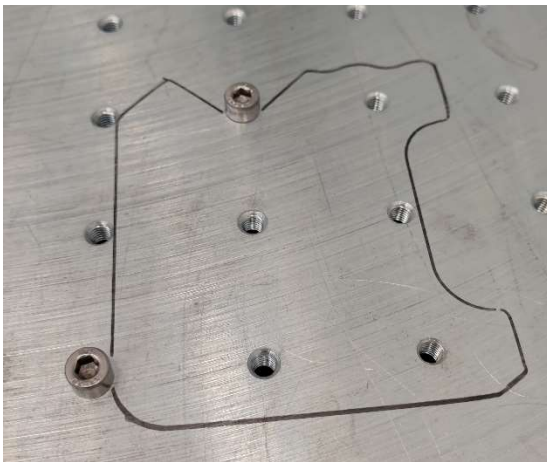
The outline and the screws can be clearly seen in this picture. The jig helps user to position the part very similarly in each measurement run. [25]
